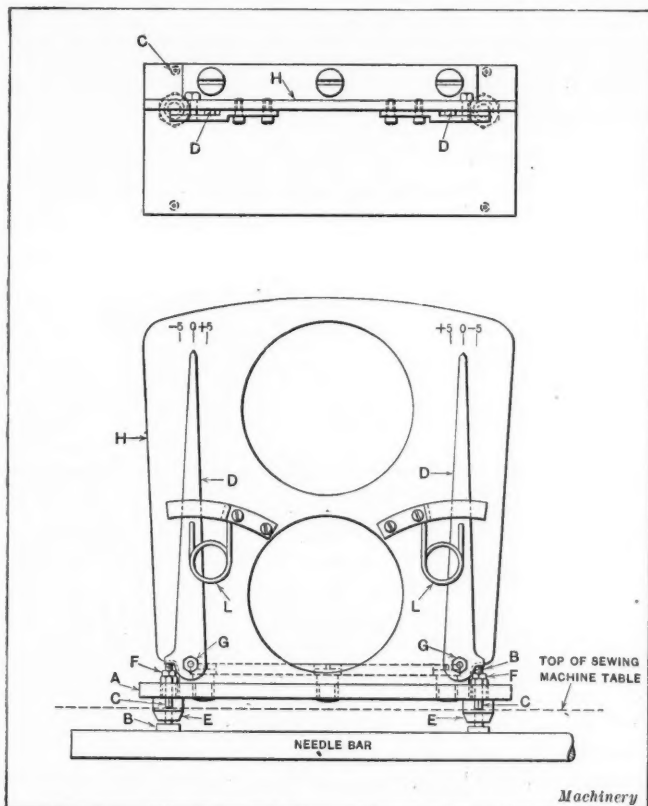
Indicating Gage for testing Parallelism of Shaft
